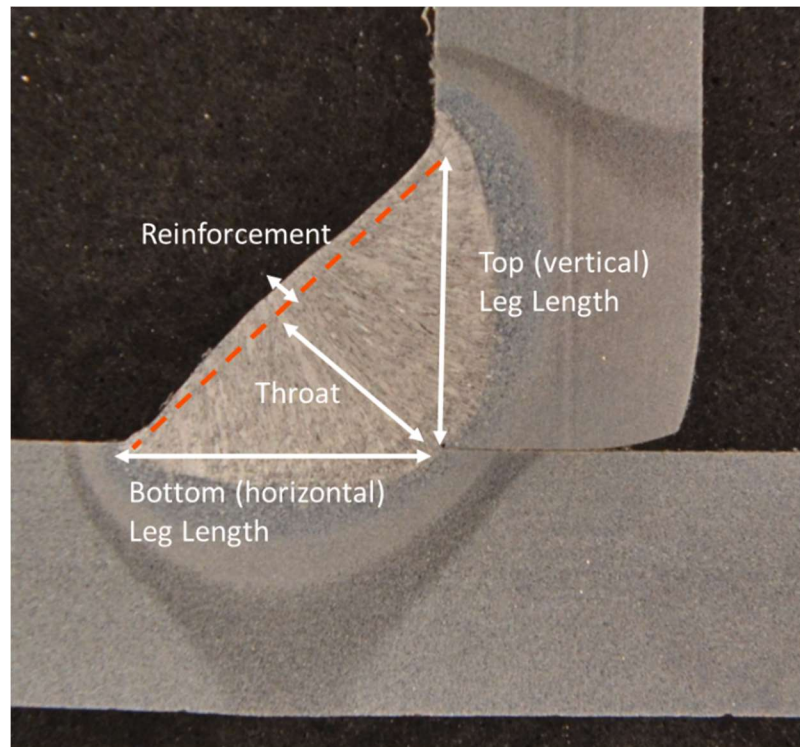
Diagram highlighting some of the key fillet weld geometrical features (Leg Length, Throat and Reinforcement)
